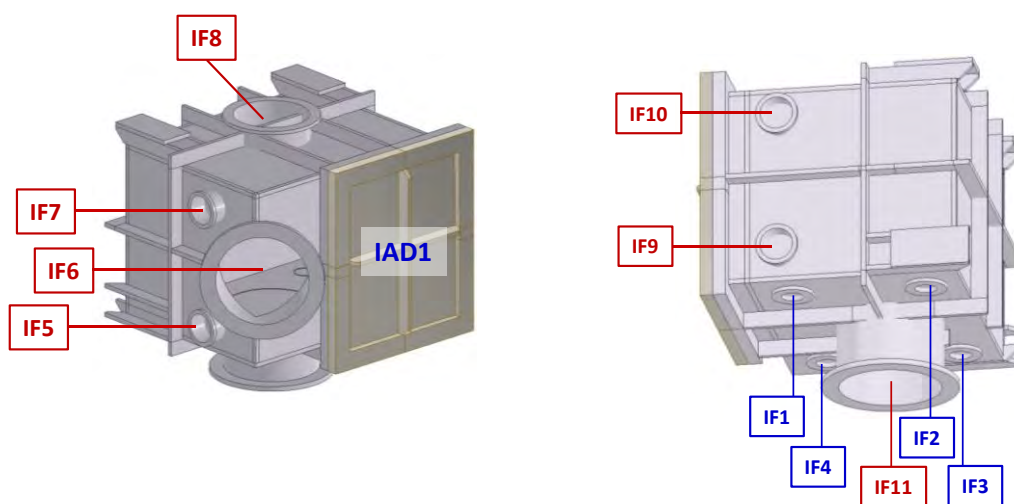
Door and circular ISO flanges on the injector chamber: views from South-East (left) and from North-West (right) showing also the chamber underside.
